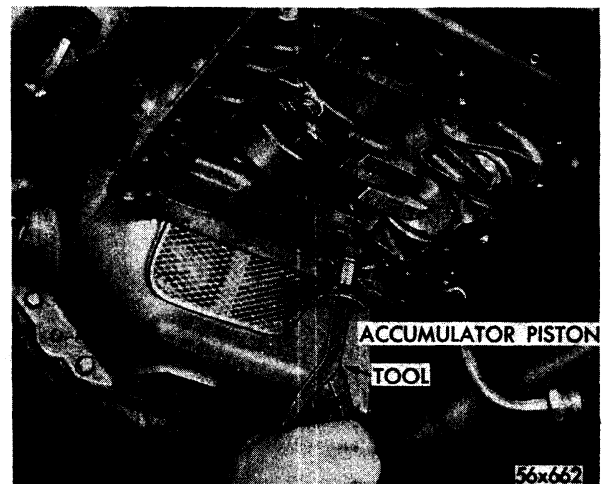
Removal and Installation of Accumulator Piston (Typical View)
